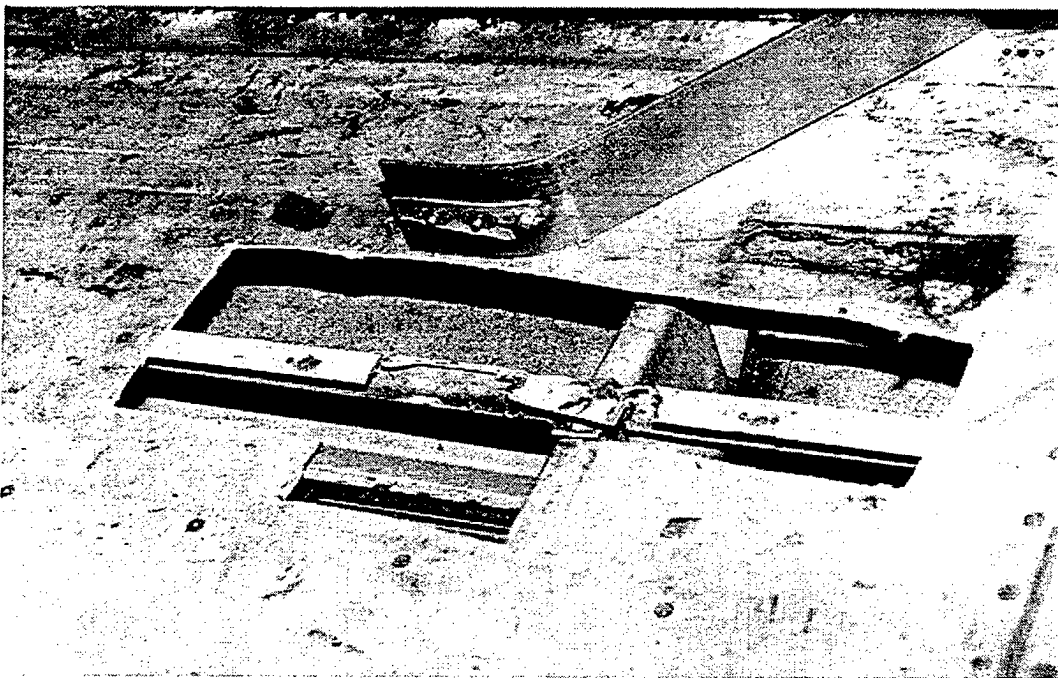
POSTTEST AUXILIARY FUEL TANK LOWER LEFT BRACKET
